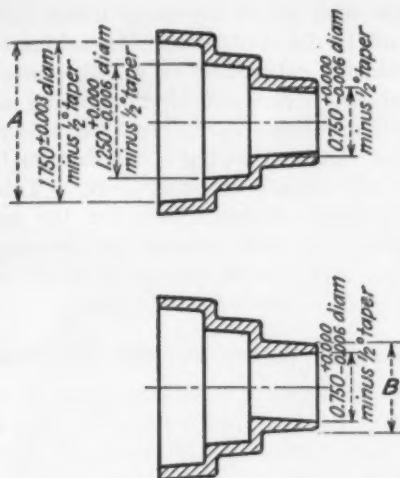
If concentricity with the 1.750 and 1.250-in. diameters, A, is important, part should be dimensioned and drafted as shown on top. If concentricity with diameter B is important, part should be dimensioned and drafted as shown in bottom sketch.
